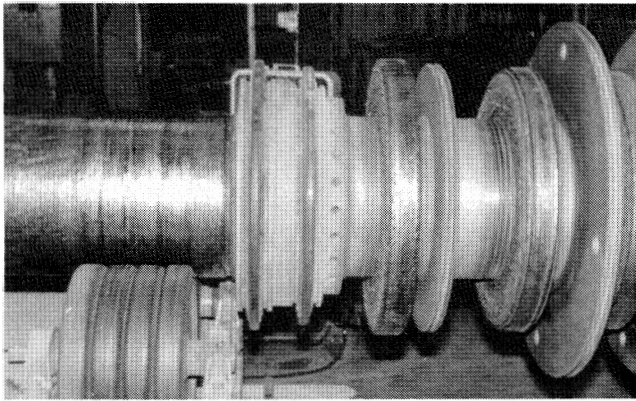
A Multiple Disc Buildup Repair of Steam Turbine Rotor Forging.
